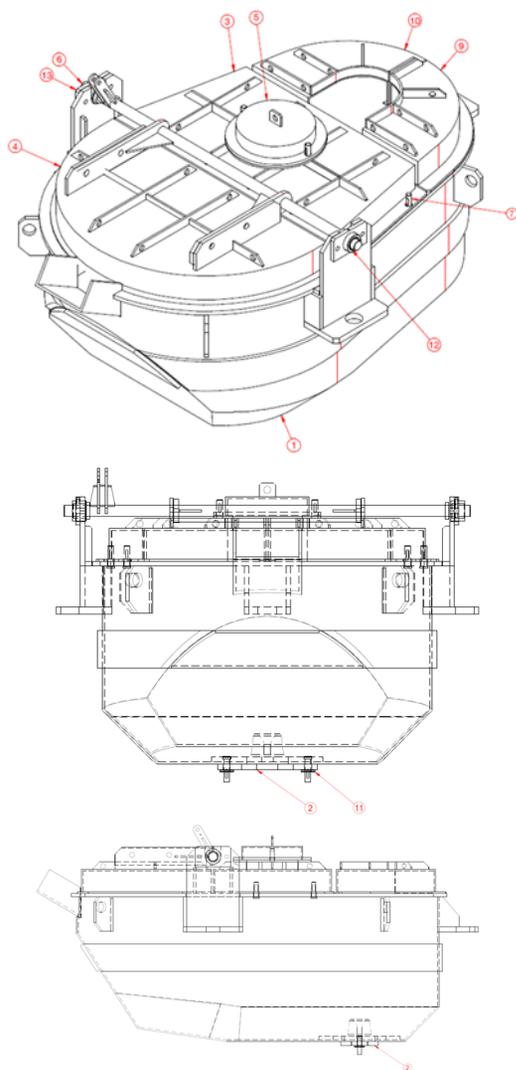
Pouring furnace overview; 1 – main vessel, 2 – nozzle plate, 3 – cover - solid part, 4 – cover - movable part, 5 – burner cover, 6 – cover opening arm, 7 – vessel stopper, 9 – right half-cover, 10 – left half-cover. 11 – insert, 12 – washer, 13 – bushing bracket
